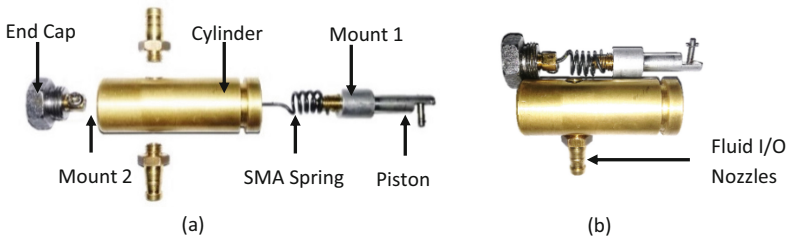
Fabricated linear actuator: (a) exploded view; (b) half-assembled configuration.
